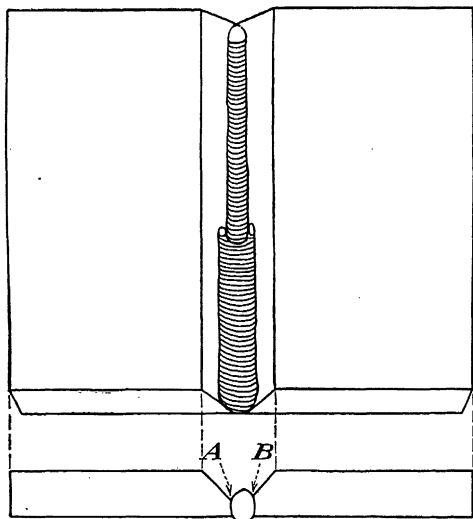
Flat butt weld. The square-U motion washes out the slag locked along the edges of the first pass at points A and B.
